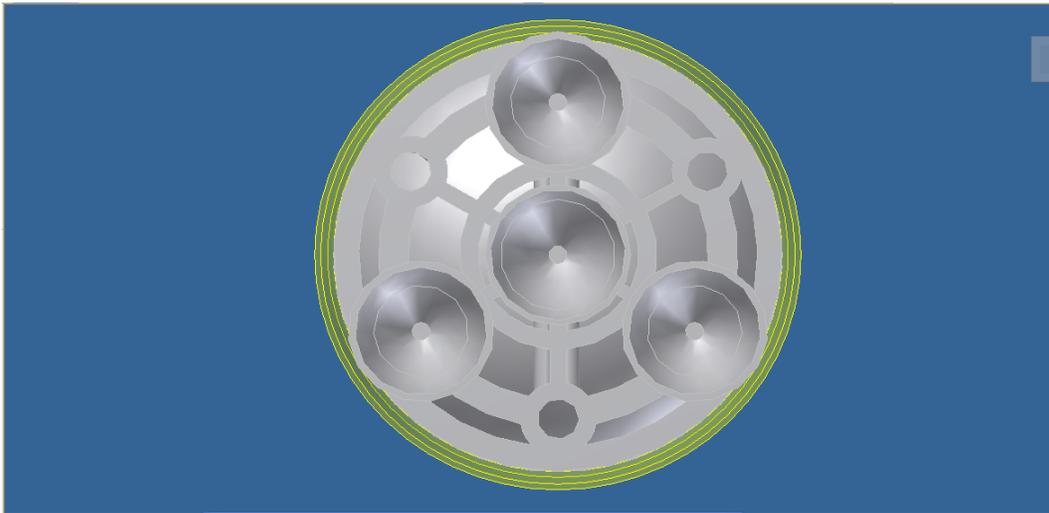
Large Diameter core with visible engine layout as per Figure. 6 (c)
